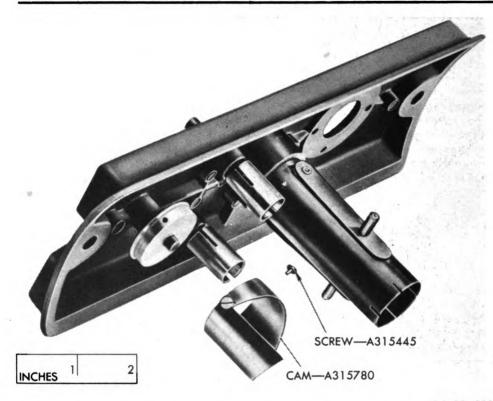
Internal Adjuster Cam Exploded From Range Knob Housing Assembly
